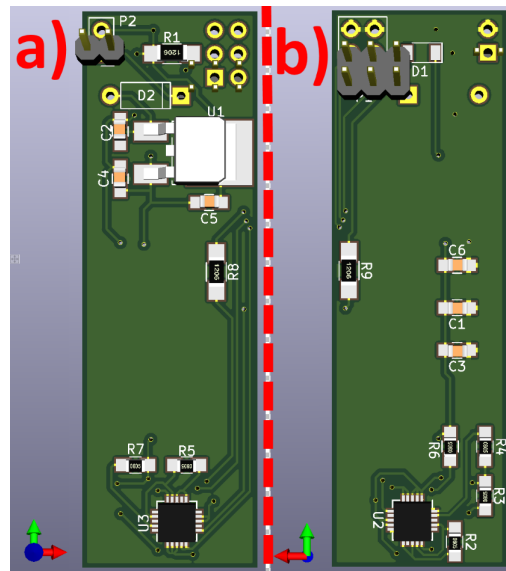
a) Front view of the PCB b) Back view of the PCB
